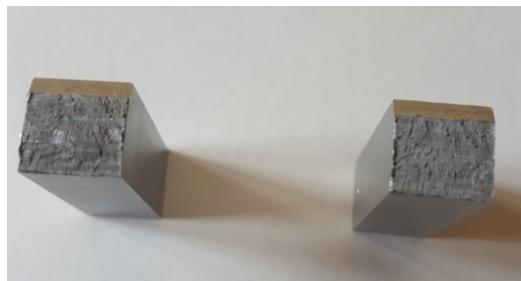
Brittle Fracture Pattern in Broken CVN Samples.
